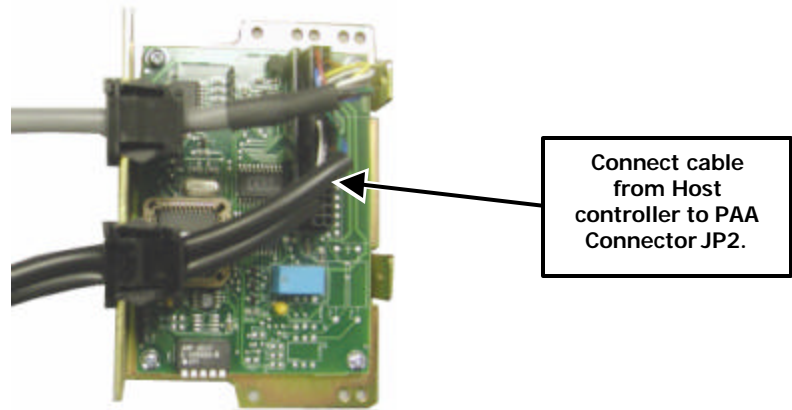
Protocol Adapter Assembly – Removal of Cover
